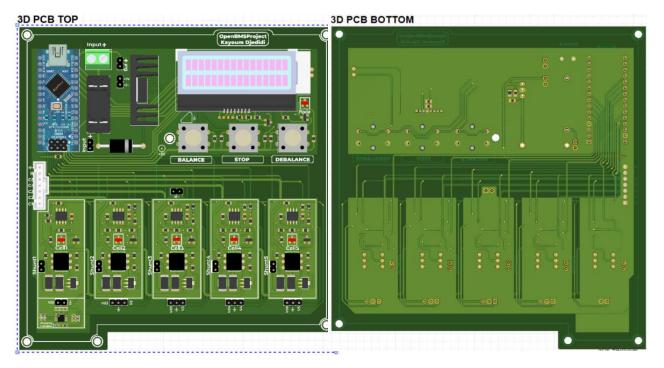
PCB 3D TOP & BOTTOM VIEWS
